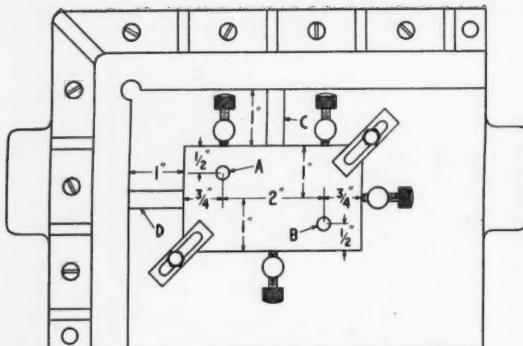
Jig Boring Plate with Work Set Up for Machining
